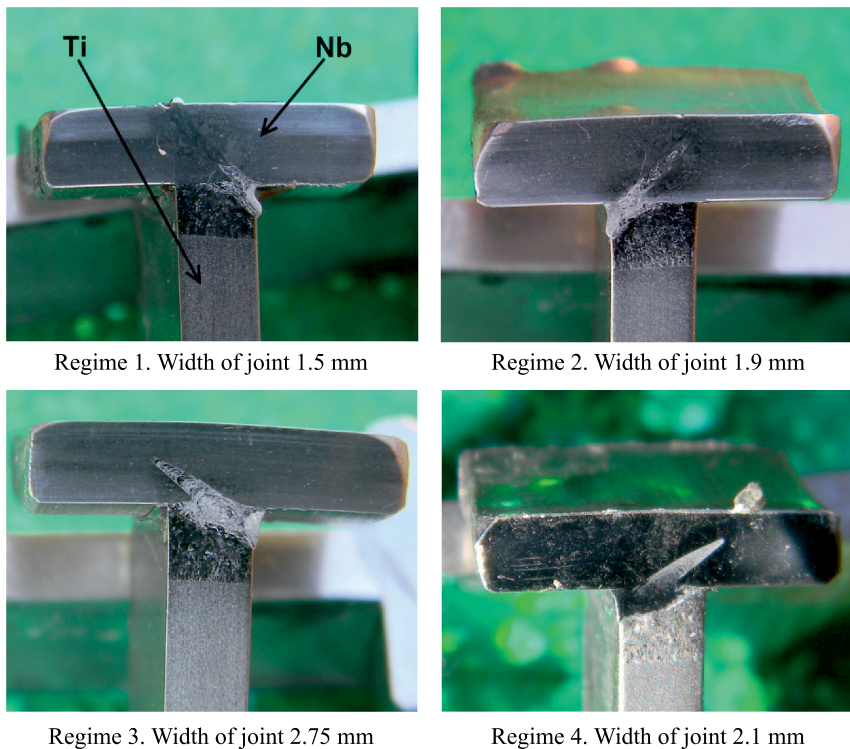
Niobium–titanium joints microsections obtained by electron beam welding
